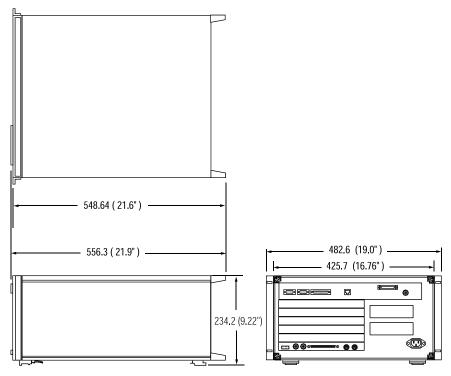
HP 16700A, 16701A and 16702A exterior dimensions. Dimensions: mm (inches).
